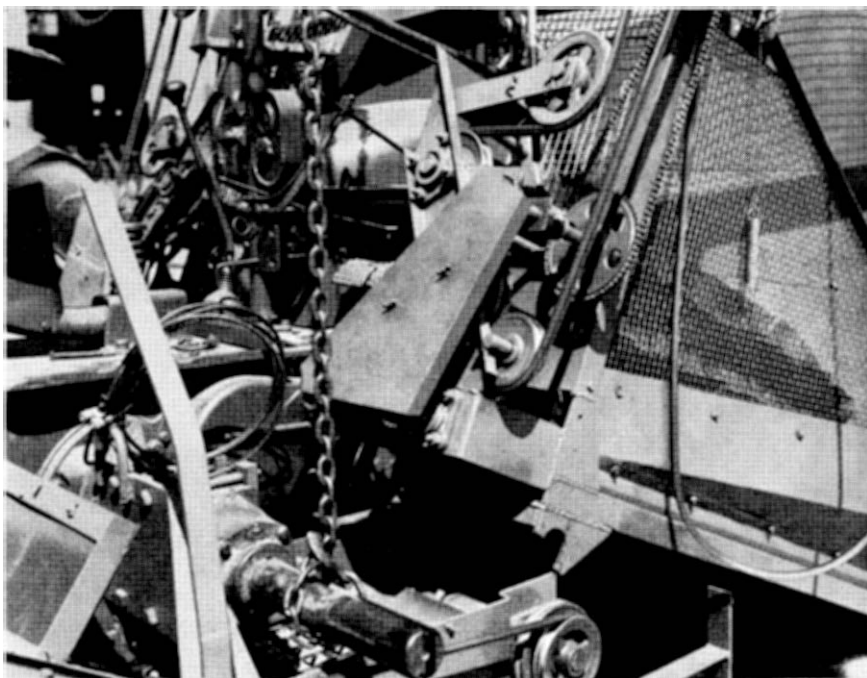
View shows front section of harvester being moved into position for attachment to the tractor.
